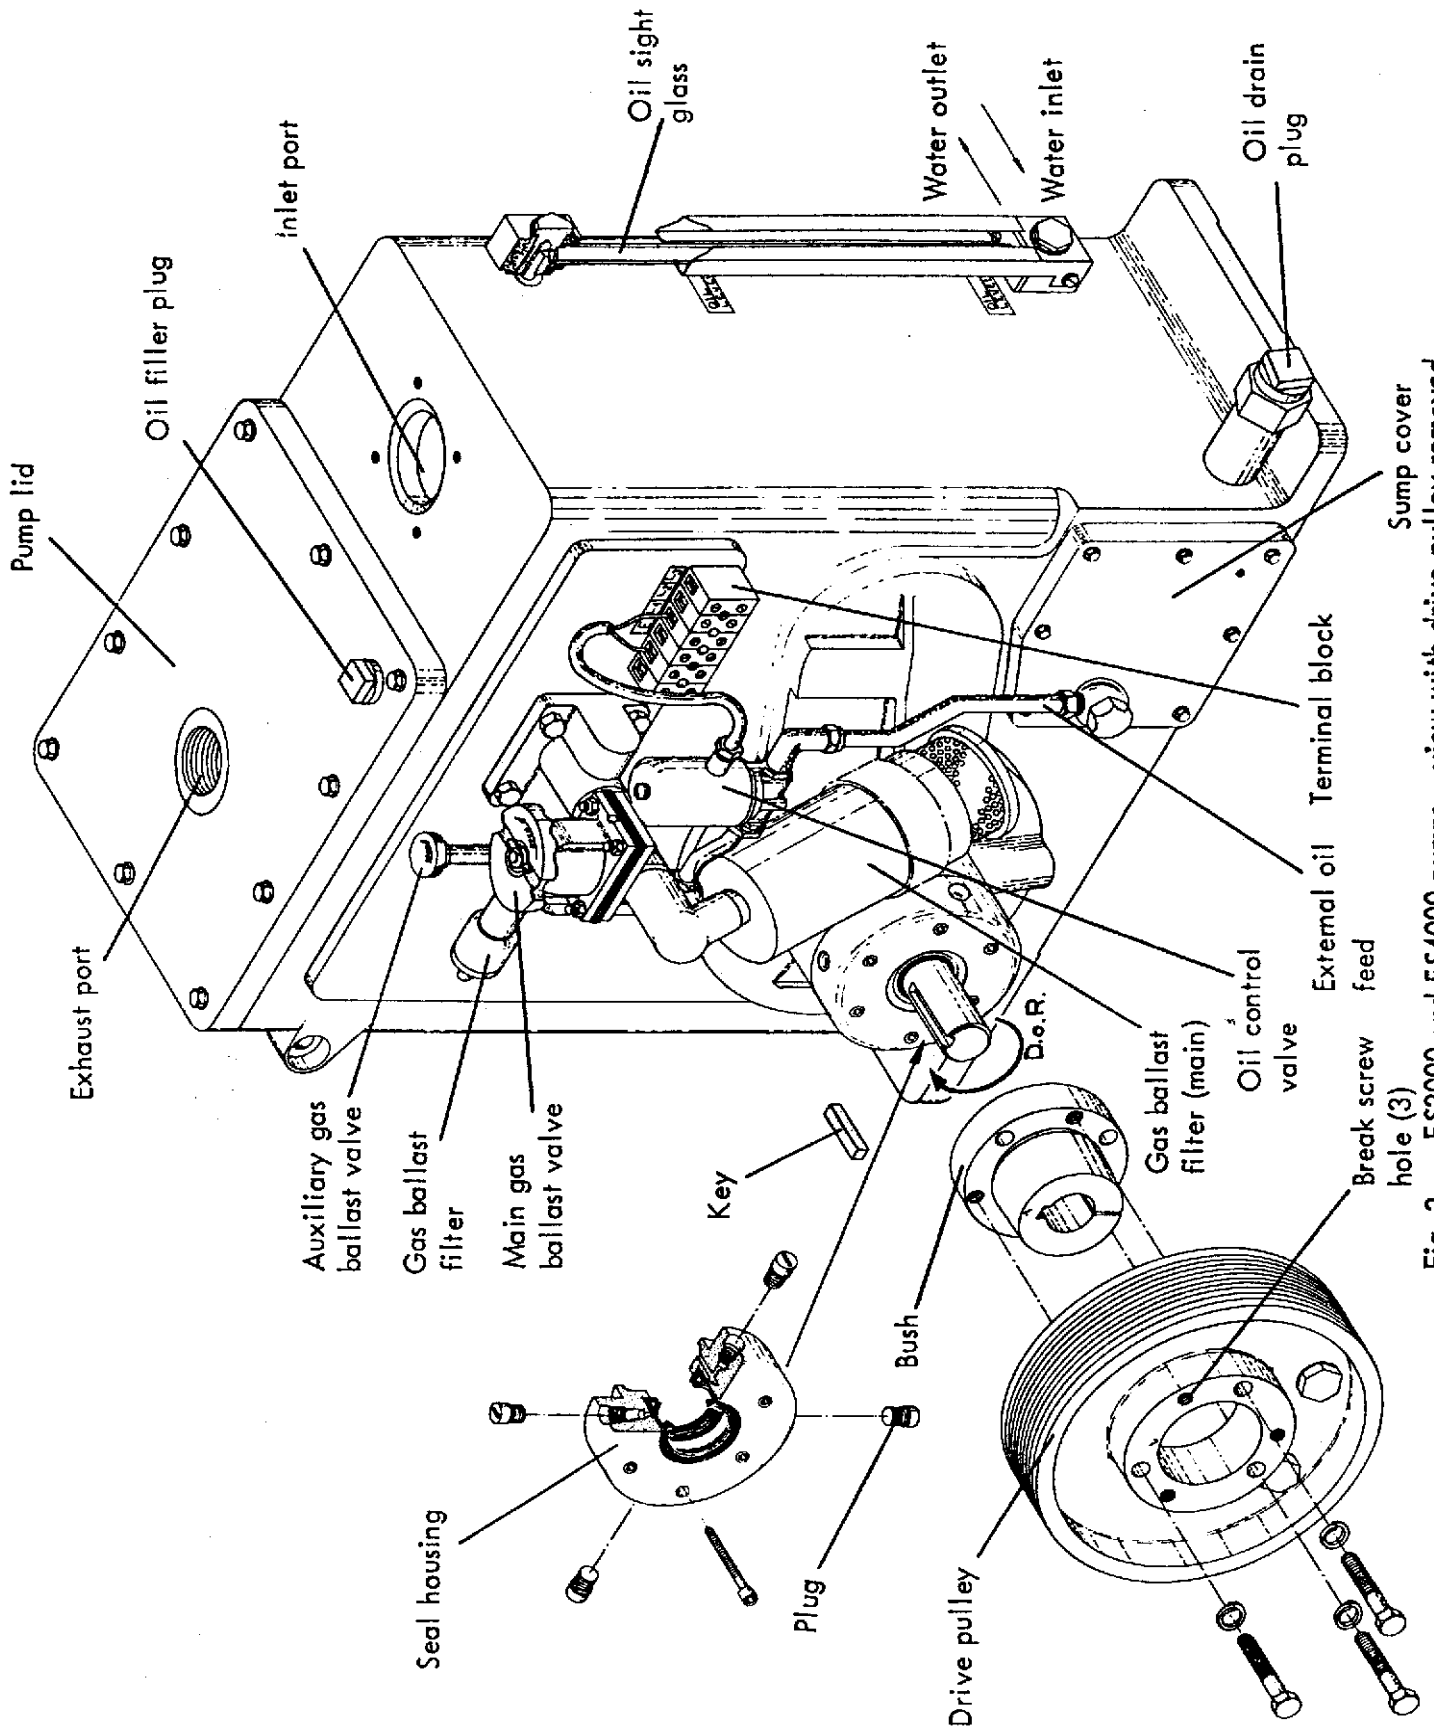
ES2000 and ES4000 pumps - view with drive pulley removed
